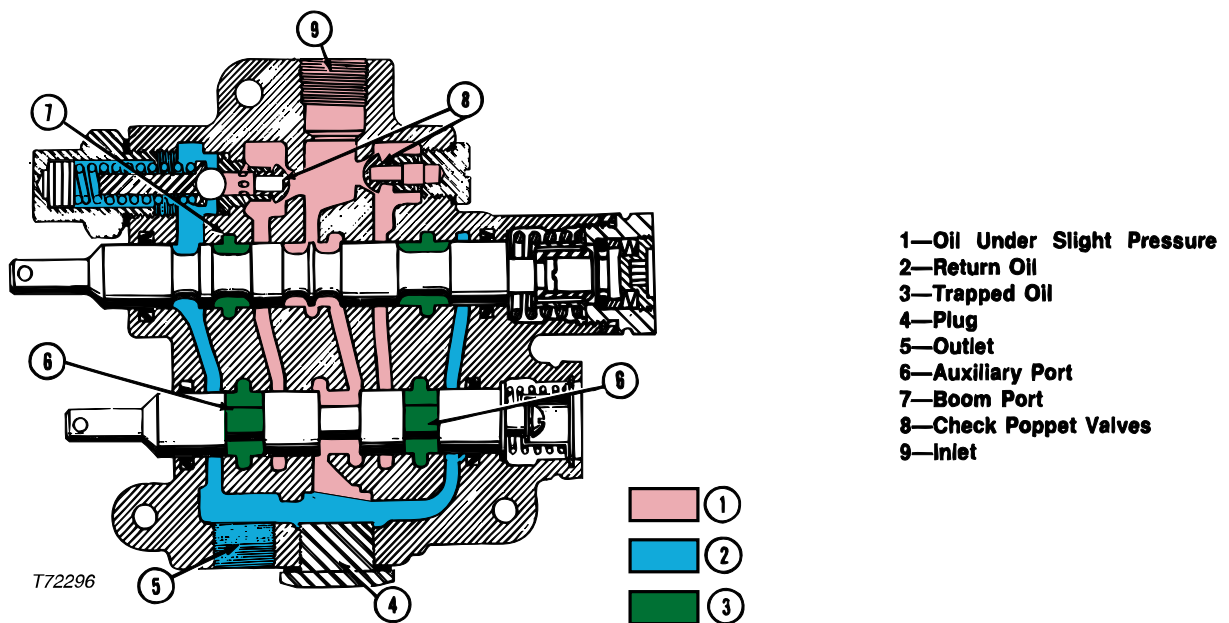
Control Valve in Neutral Position (2-spool valve shown)
